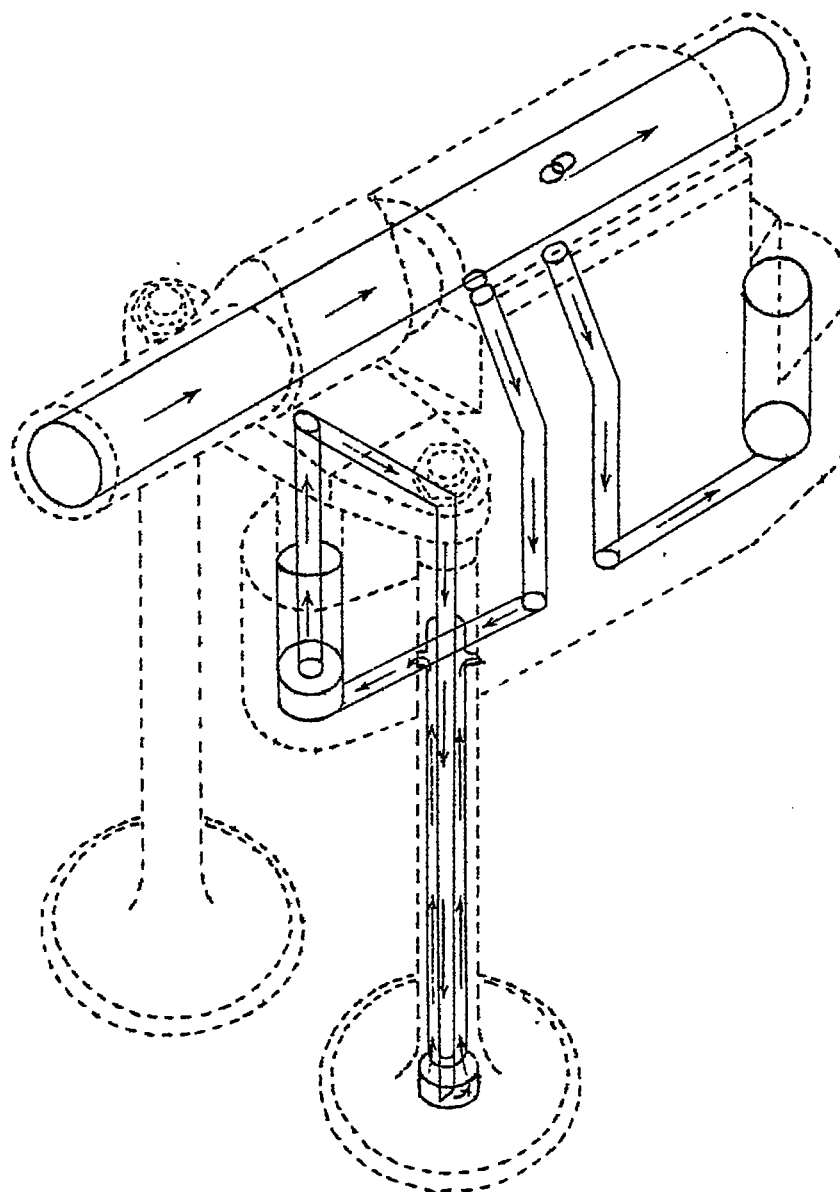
Packard 1A-1500 oil cooled exhaust valve.
